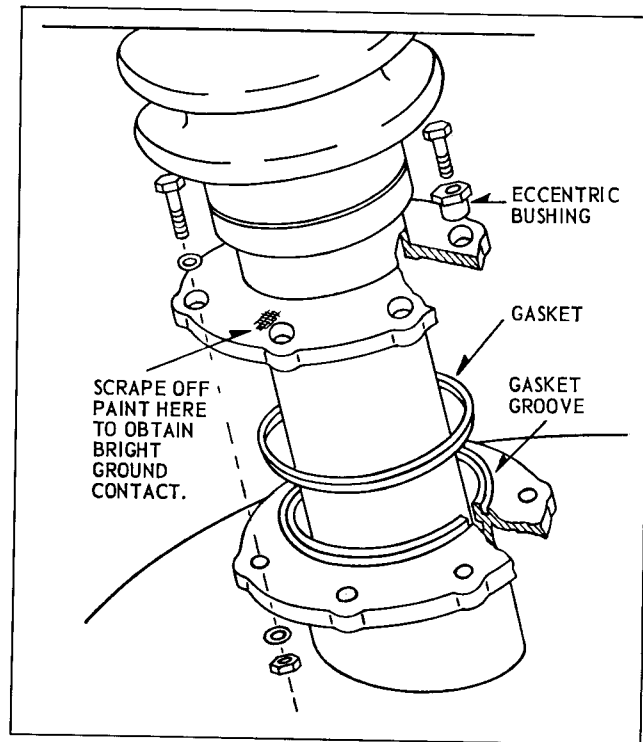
B. *Installing Bushing on Circuit Breaker
